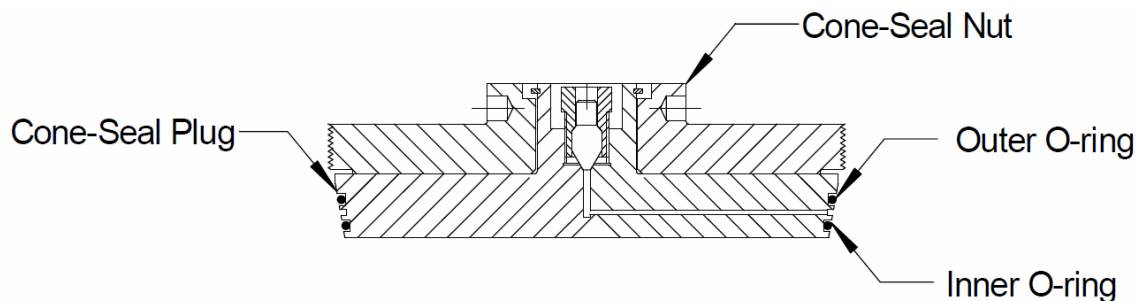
Cross-Section of the Chalfant-Style Cone-Seal Closure Assembly
